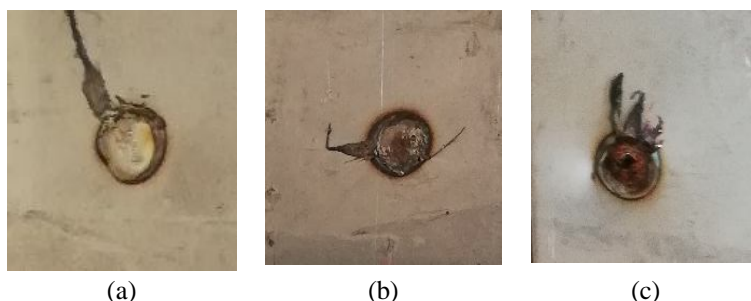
The appearance of welding cores of samples welded using an uncooled CuCrZr electrode and a) 5 Cycle, a) 10 Cycle, a) 15 Cycle welding time under 4 Bar electrode force and 5.4 kA welding current.
